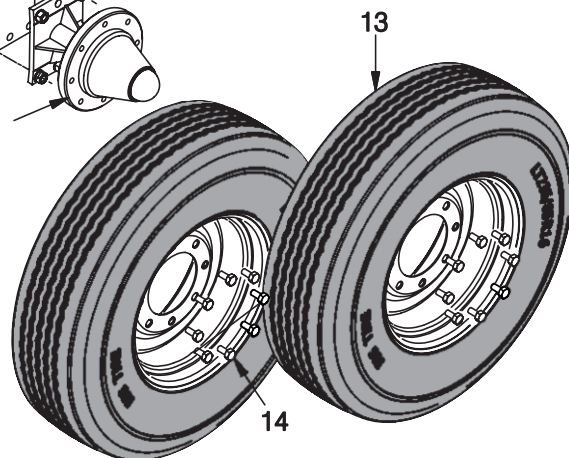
Mounting Tandem Wheel Plate, Hubs and Tires
